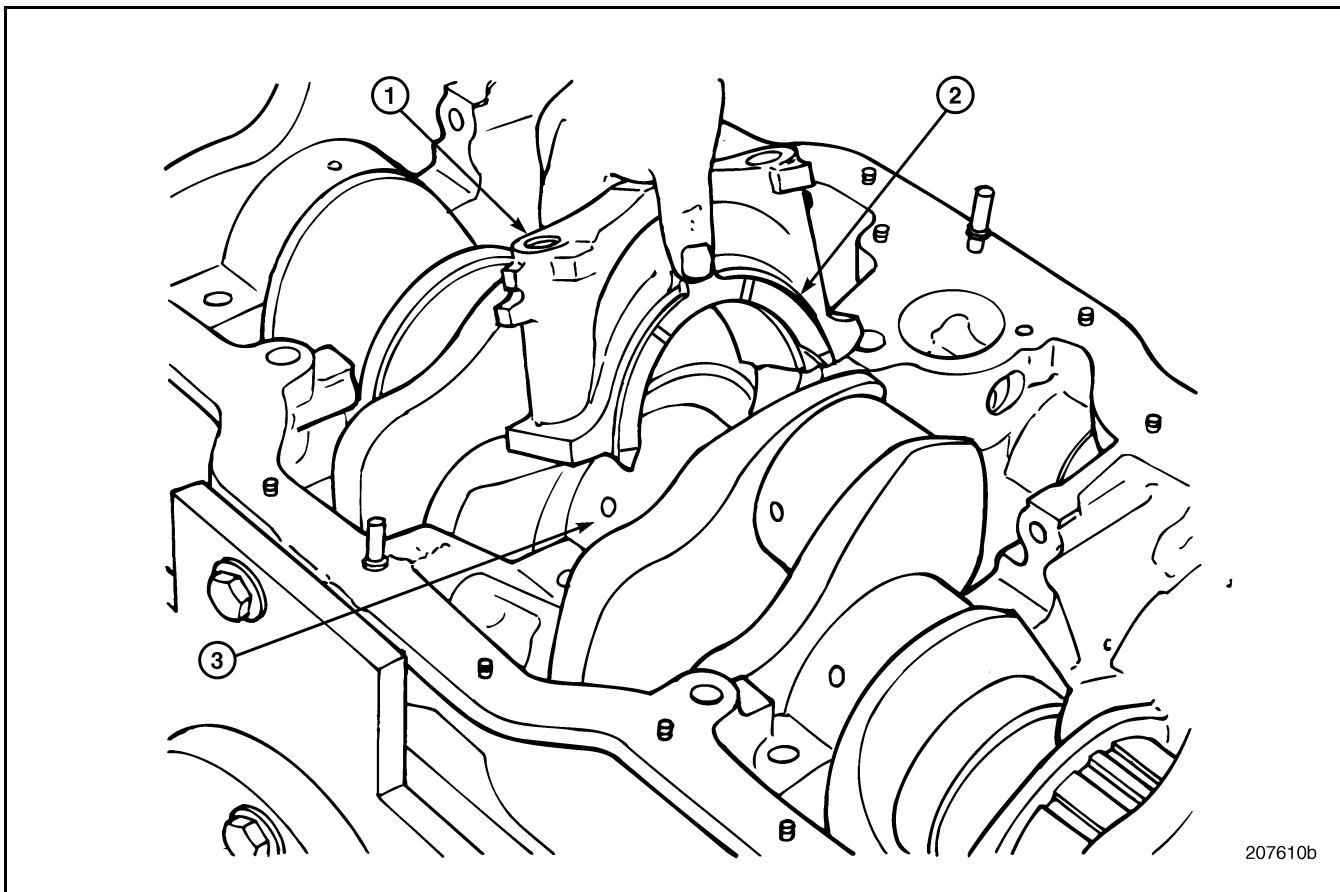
Main Bearing Cap/Thrust Washer Installation
